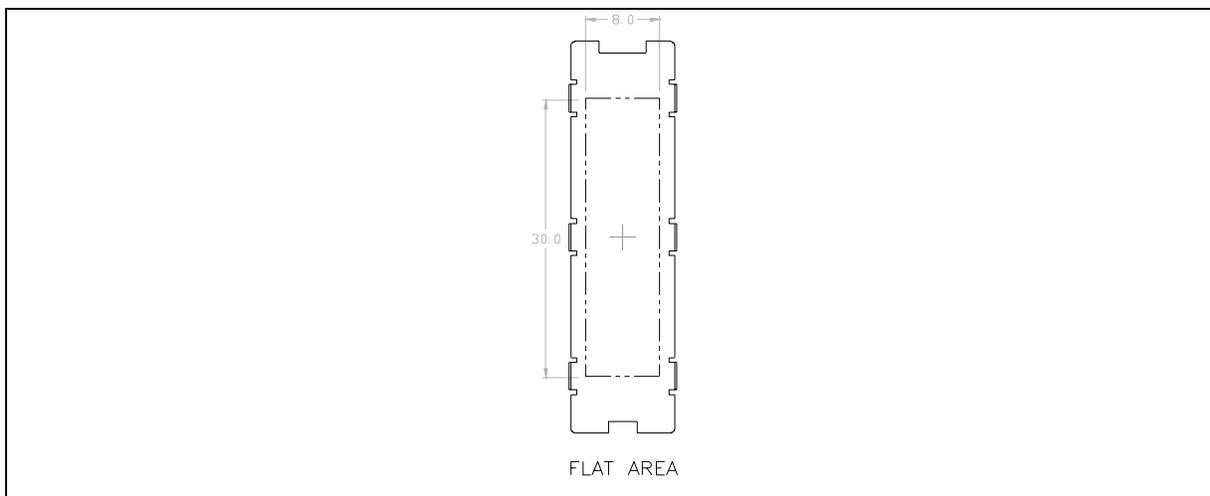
Vacuum Pick-Up Cap (Dimensions in mm)
